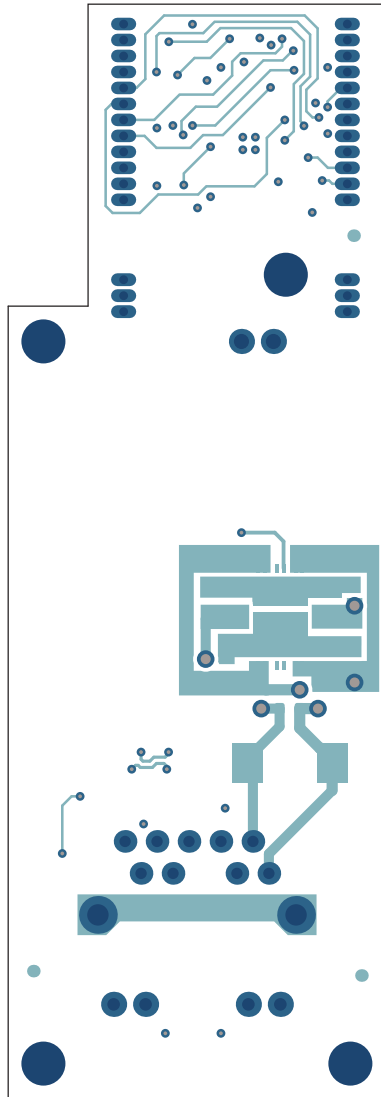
Bottom Board—Middle Layer 1 Copper
